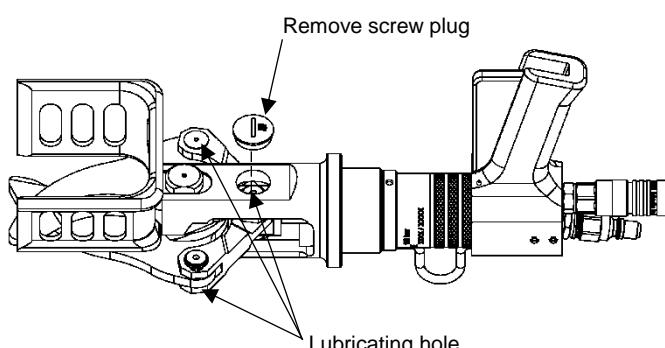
Lubricating points – machine without cover (example Z100, Z078, Z090, Z160)
